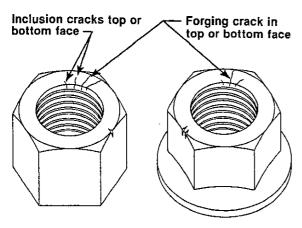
TYPICAL FORGING AND INCLUSION CRACKS IN NUTS
